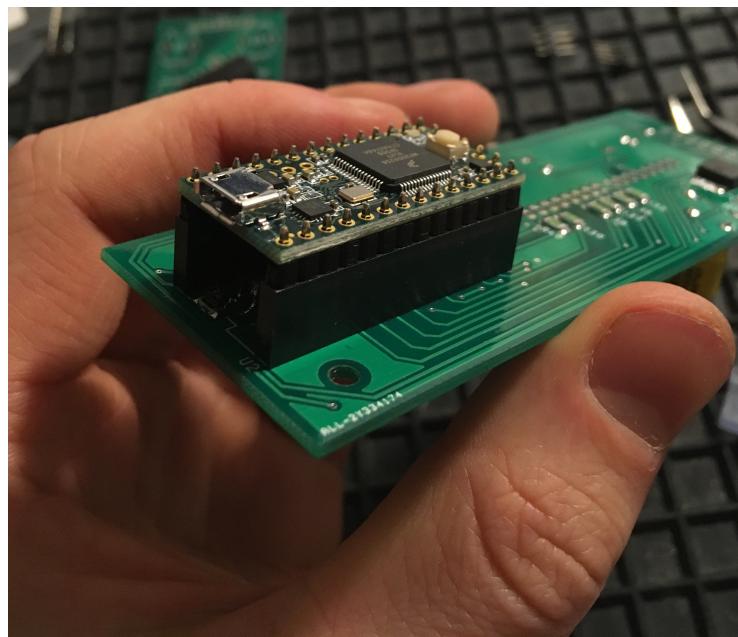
Plug the female headers into the male headers and put the Teensy on the BOTTOM PCB and solder the Teensy's male headers and the female headers.
